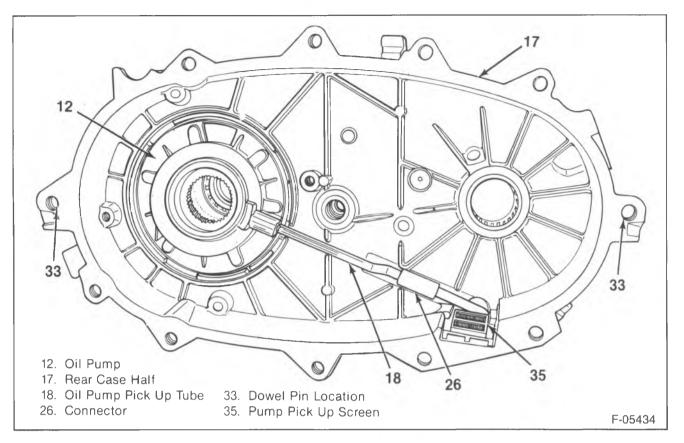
Oil Pump Pick Up Screen Doweld Case Holes
